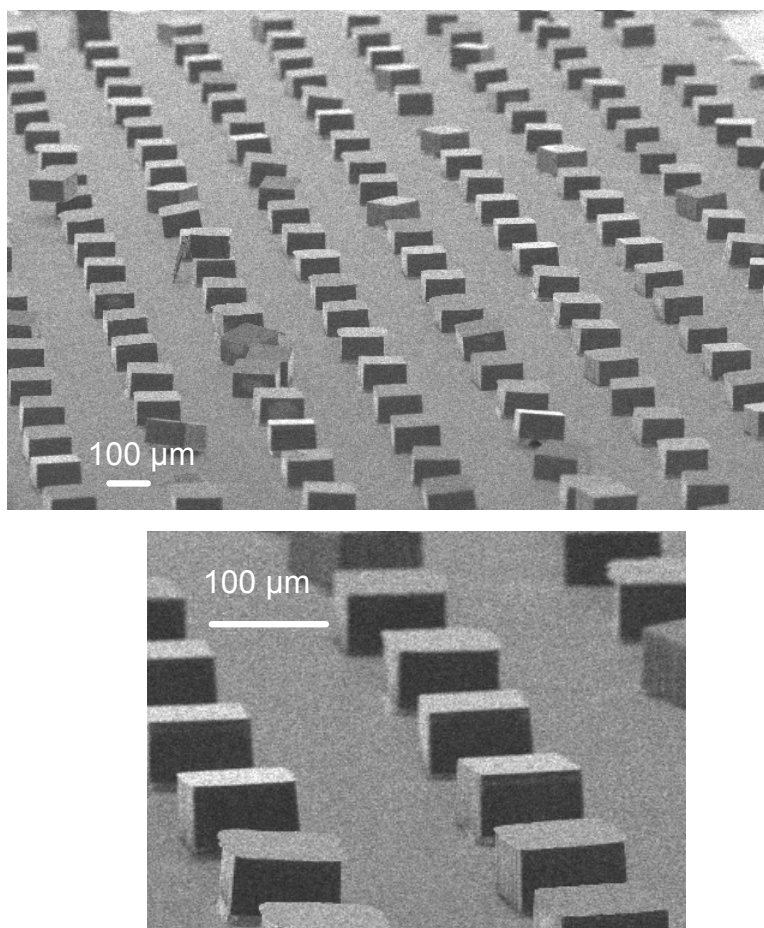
Self-assembly with 100 μm square, 50 μm tall parts exhibiting 96.5% yield.
